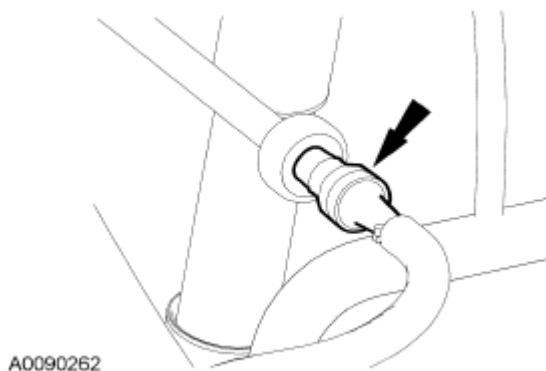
Locating Vacuum Reservoir Tube & Position Aside
